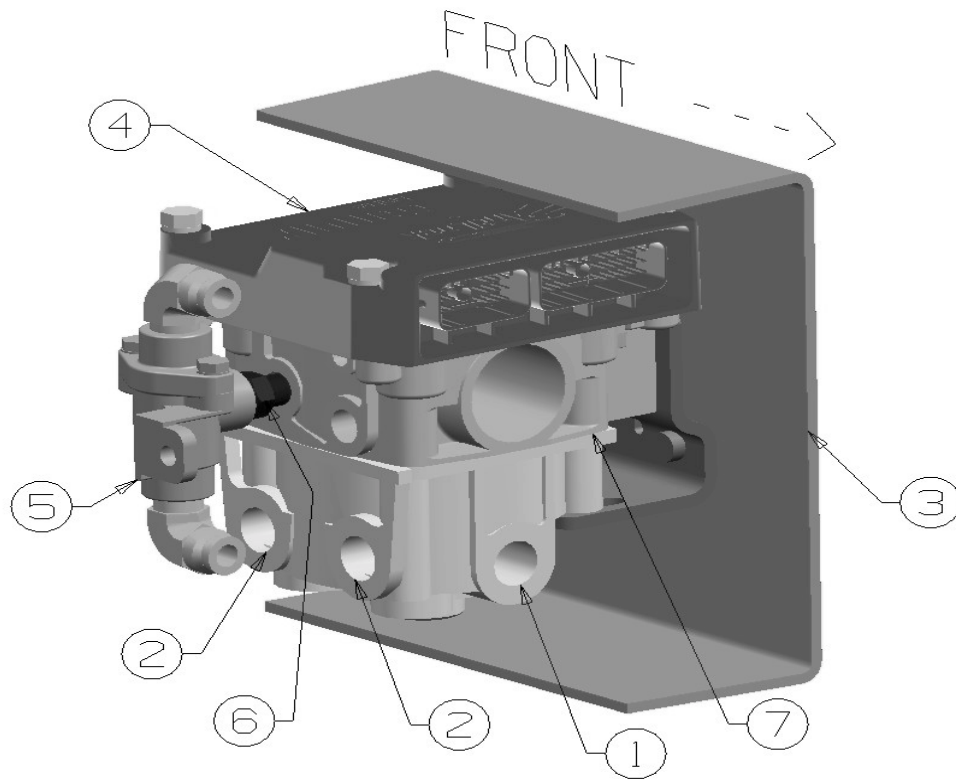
Original Relay Valve and Double Check Valve Assembly With the Subject Fitting
